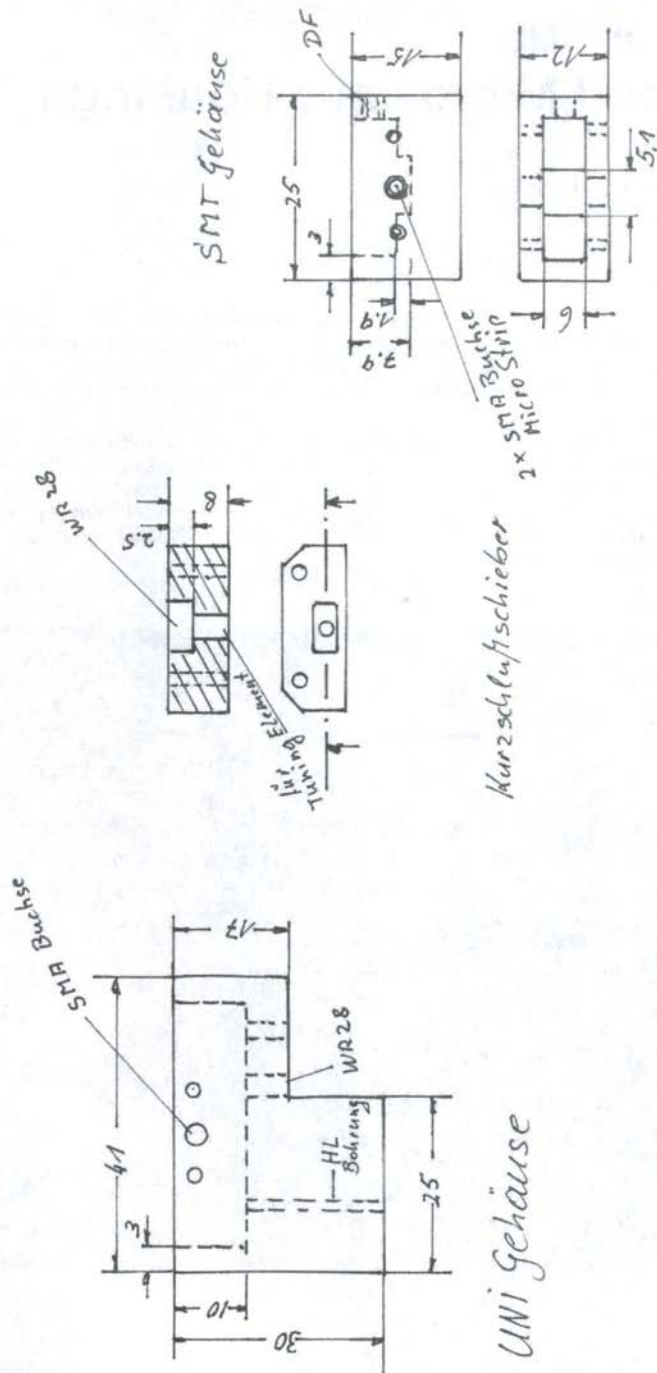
Sketch - from top to bottom: SMT housing, short circuit slider and UNI housing
